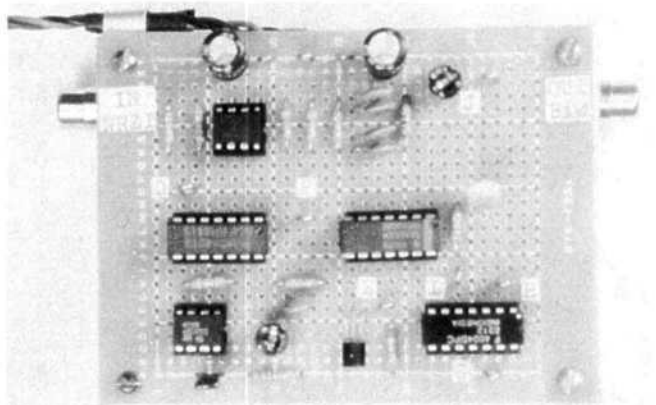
NRZI-to-BiΦ assembly mounted on a 2 3/4 x 3 3/4-inch perf board.
